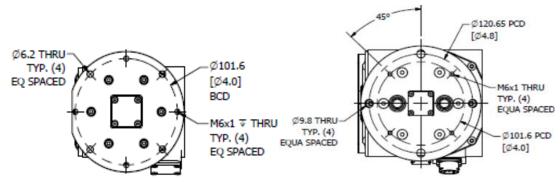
Product Mounting Hole Pattern AP-8 CR & AP-30 CR / AP-50 CR (See Section 6.2 for Enlarged version)
